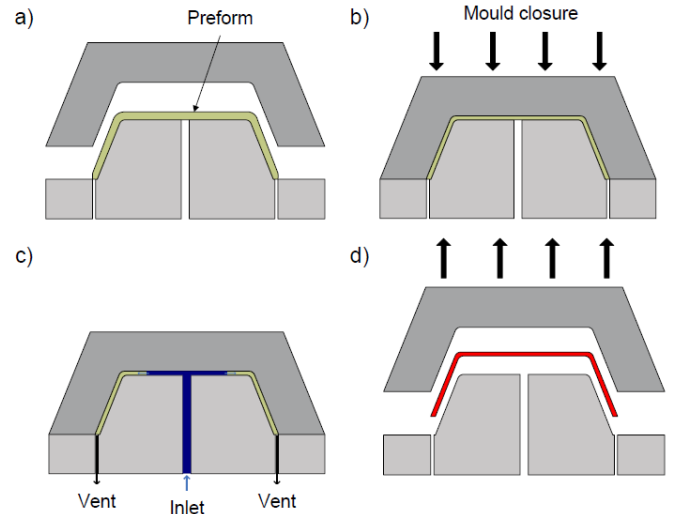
Workflow of RTM [52]: (a) placement of preform, (b) complete mold closure to desired part thickness, (c) high pressure liquid resin injection, (d) extraction of final part.
